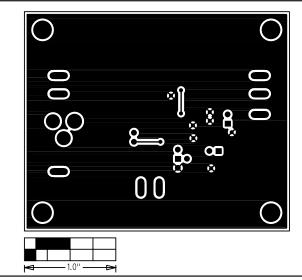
MAX1879 EV Kit PC Board Layout—Solder Side
